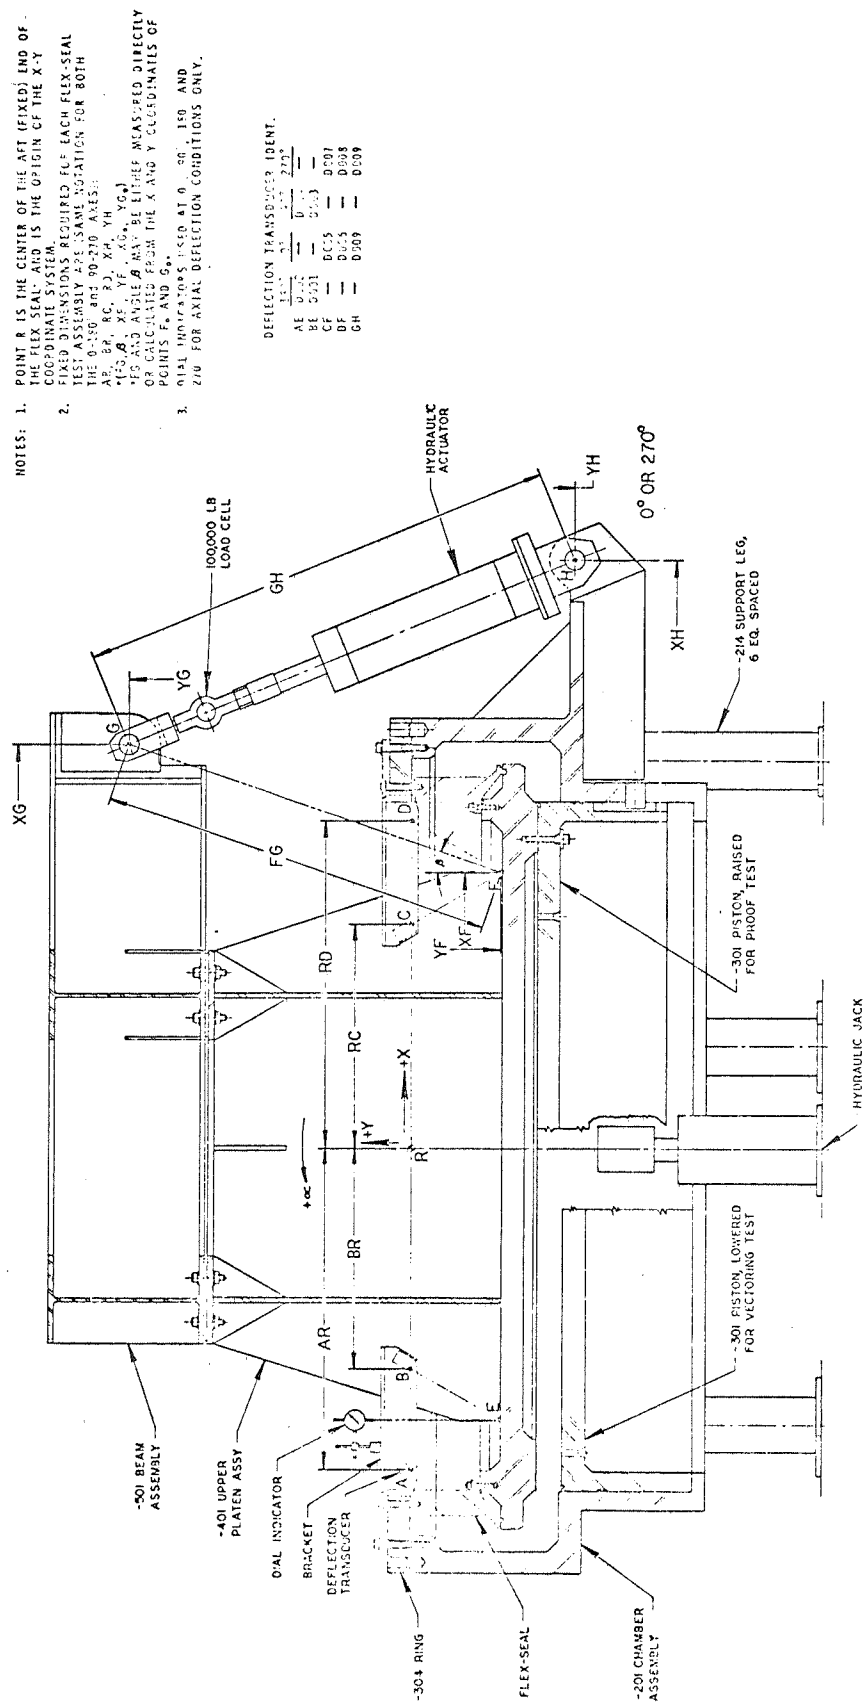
Assembly of the Flexible Seal on the Test Fixture
